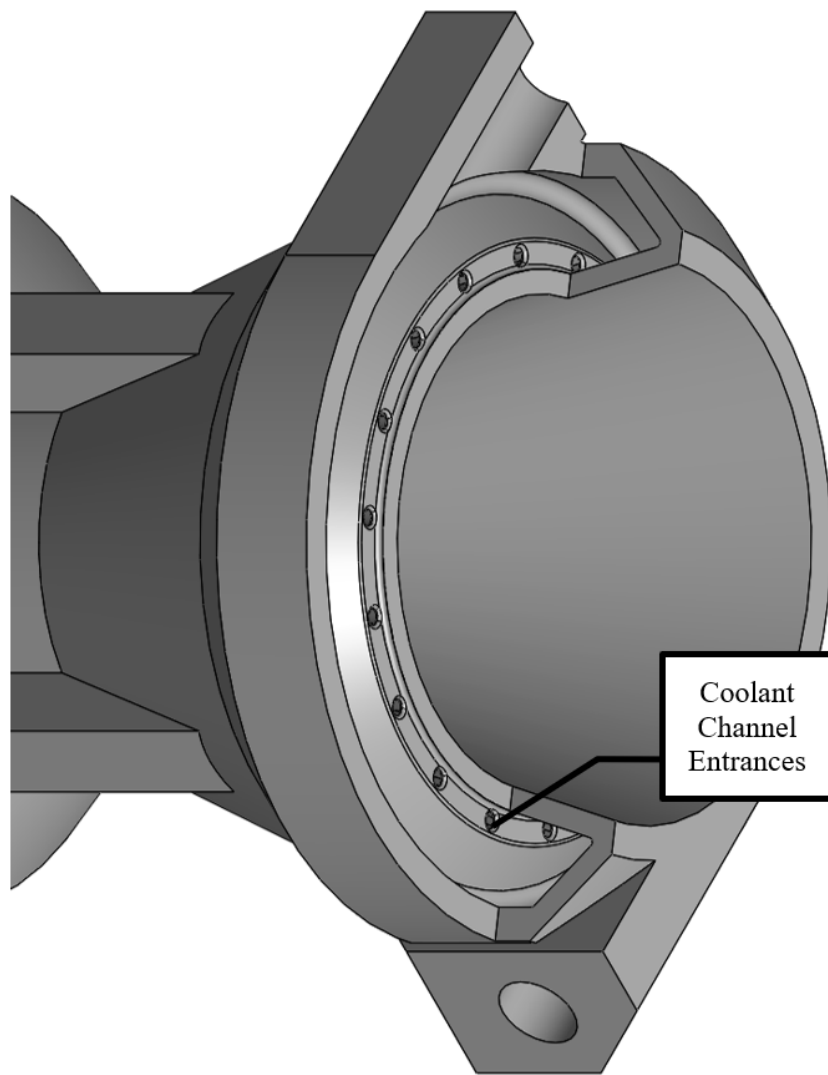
Section View of Chamber-Nozzle Header, Channel Entrances, and Inlets
